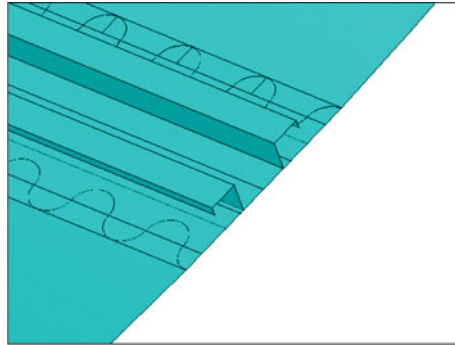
Assembly showing stringer, doubler plates, outer and inner skin panels
